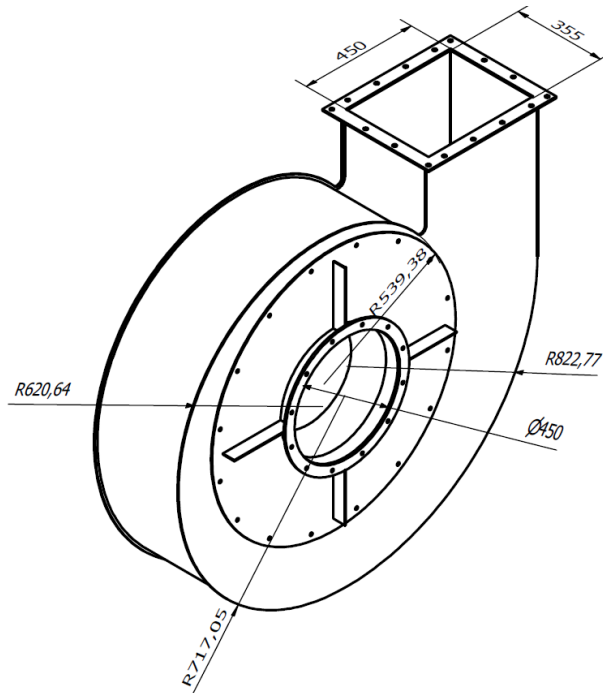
Geometrical model of the designed centrifugal fan volute casing with main dimensions
